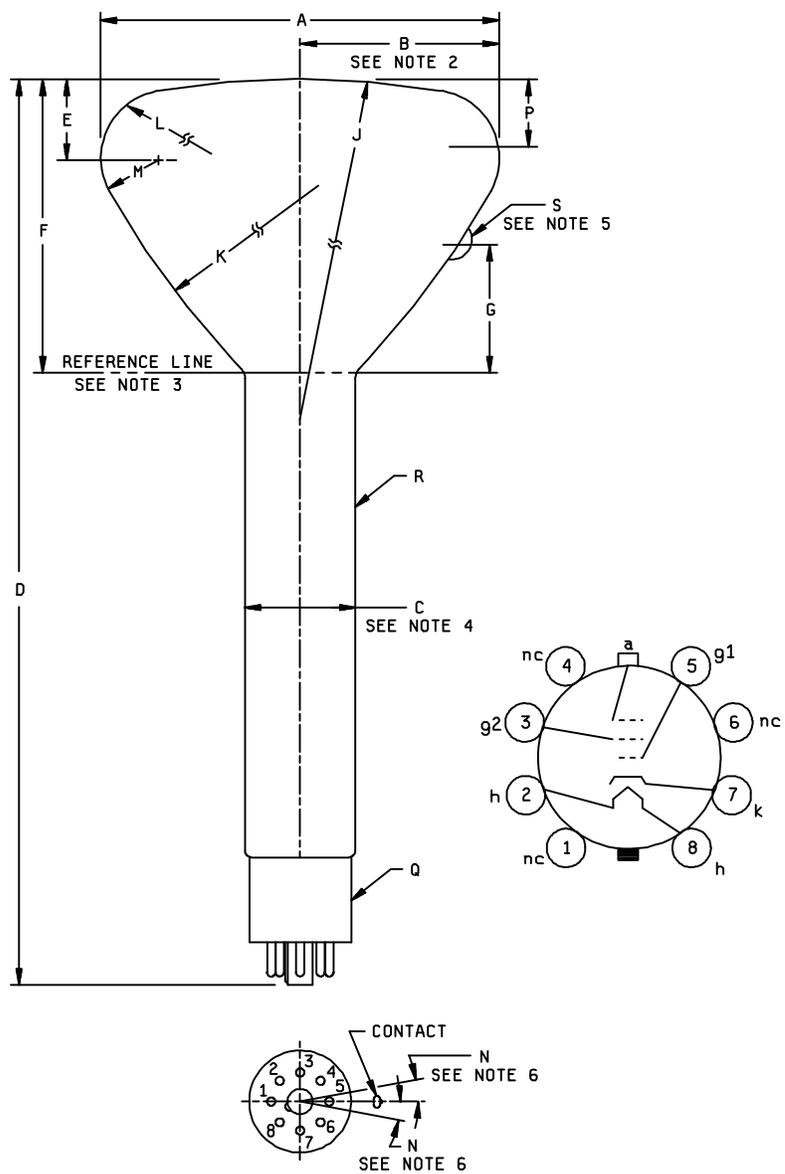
Outline drawing of electron tube types 5FP7A, 5FP14A, and 5FP25.
